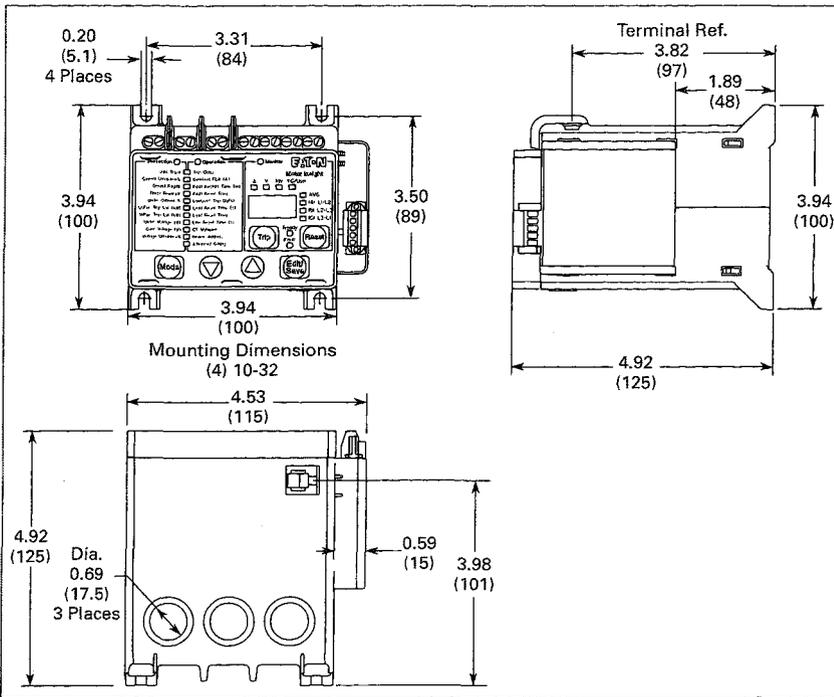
Motor Insight with Mounted Modbus Communication Module — Approximate Dimensions in Inches (mm)
